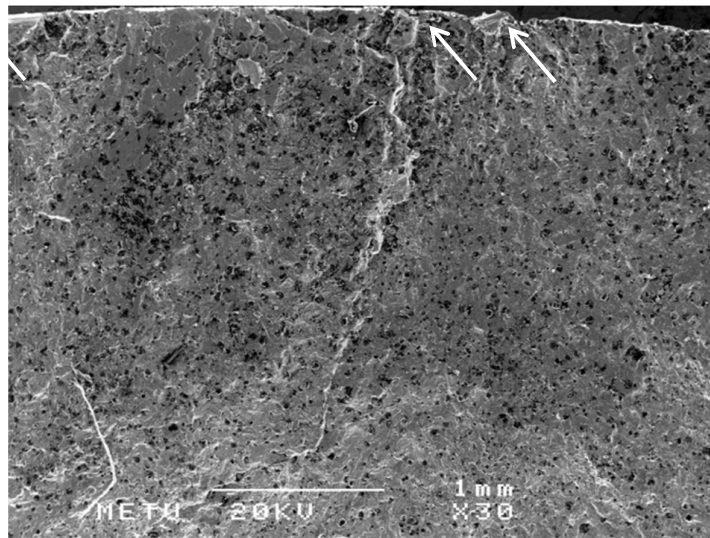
Fractograph showing the crack initiation region, X30 (EN-GJS 800-2 crankshaft rolled at 15kN).
